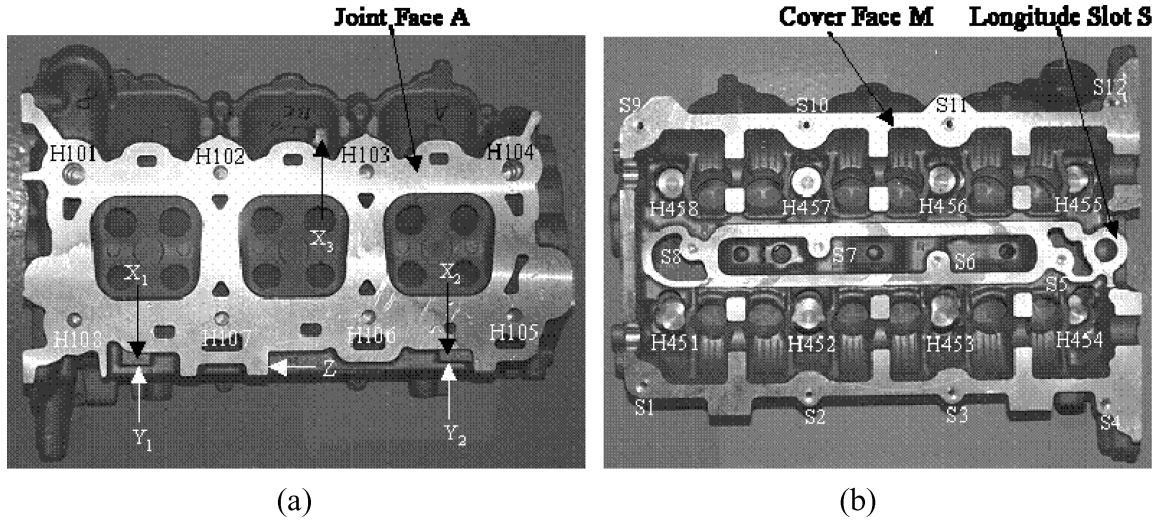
The final product and its key features: (a) the joint face of the engine head; and (b) the cover face of the engine head.
